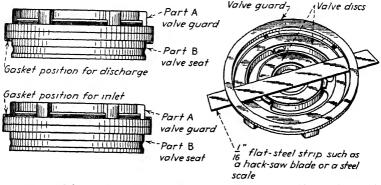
Slide a metal strip through guard openings to hold the plate and springs until scat is snapped into place.
